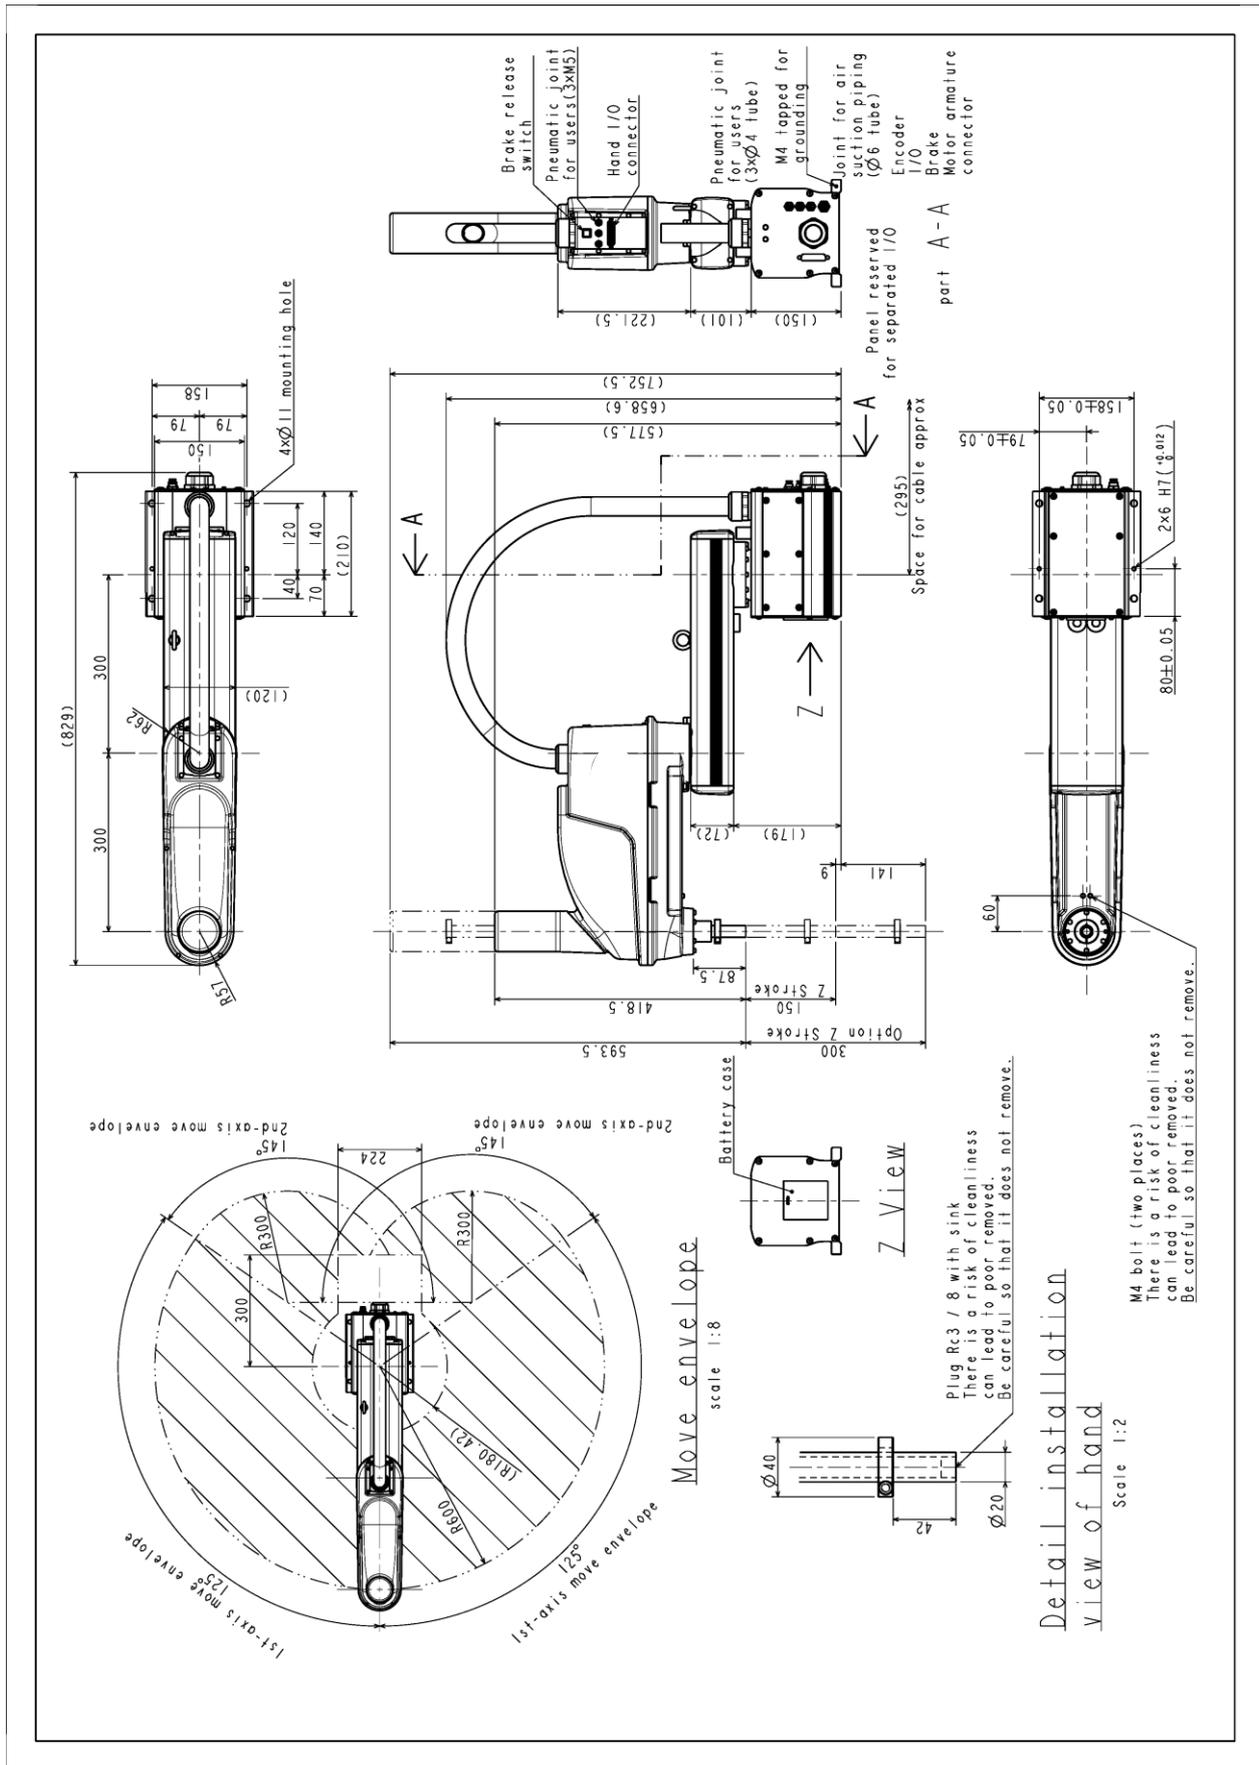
Outline drawing and operating range (KHL-600NSCN)
